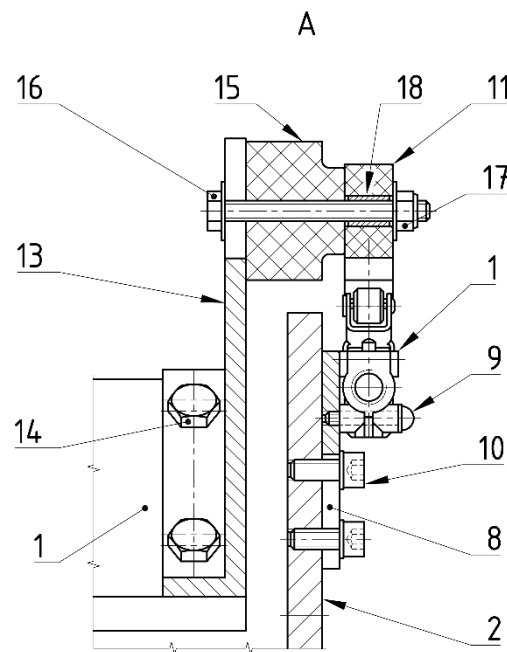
Pneumatic flexible shaft coupling with mechanical constant twist angle regulator, detail of cam and roller valve connection
